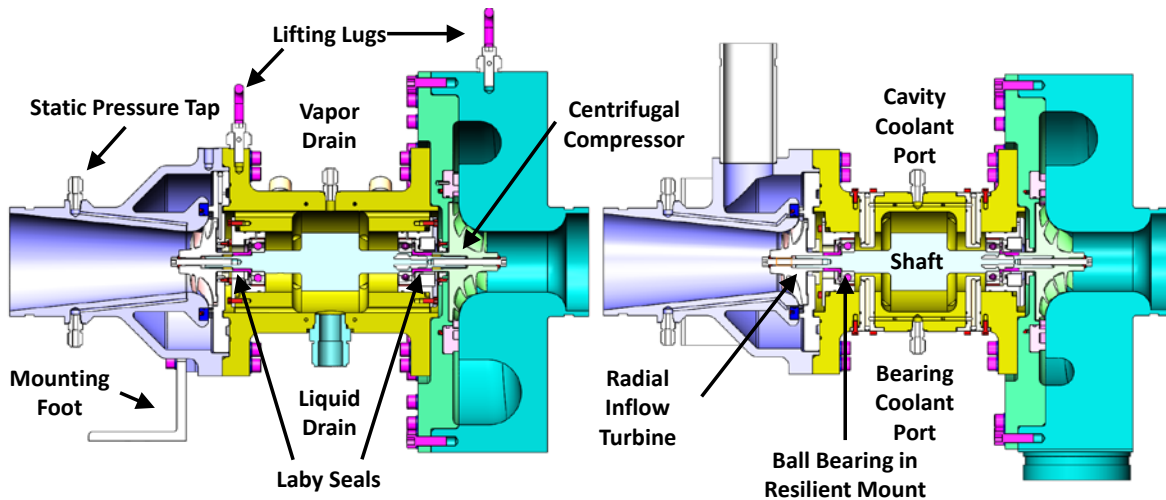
Labeled cut-away schematic of the custom fabricated turbo-compressor
